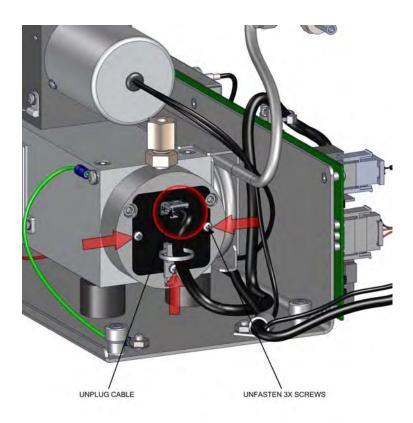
Replacing the Photo Lamp Detector Board pt 1
